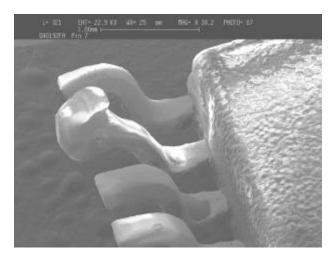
A tilt SEM view of Pin 7 reveals a large glop of solder on the end of Pin 7, the bottom of which appears to have two surfaces as seen in the image at right.
